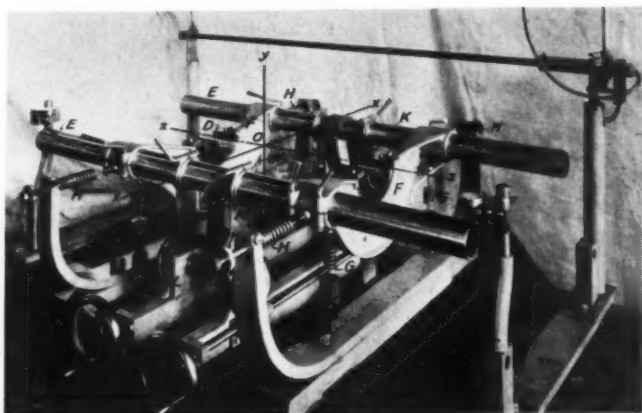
Cradle of dynamic balancing machine showing supporting springs and half bearings
